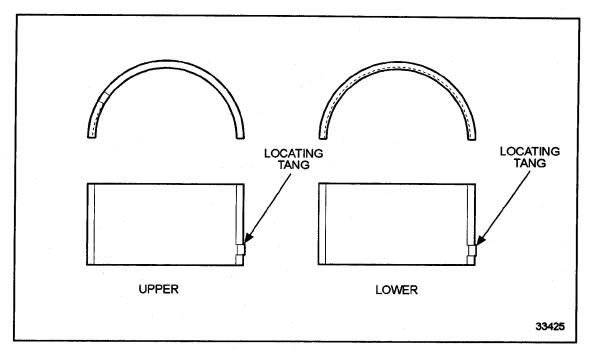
Connecting Rod Bearing Detail (Closed End Rod)
